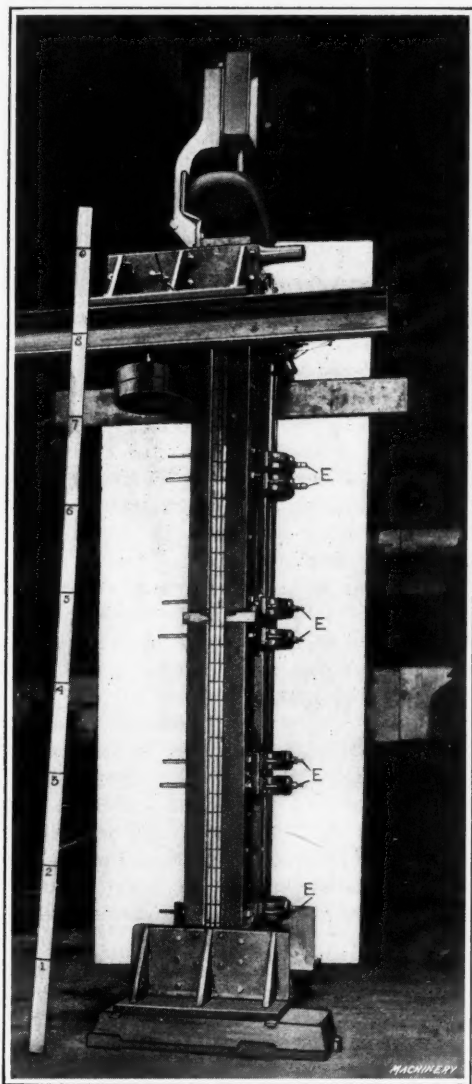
Front View of Mellen Rod Casting Machine showing Idle Side of Chain of Mold Sections
